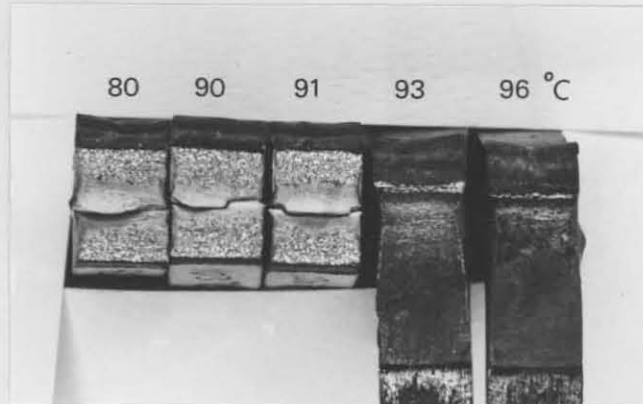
Fracture surfaces of hot rolled bead-on-plate 3CR12 bent specimens, welded with an AISI 316L filler metal. 90° bends were achieved at temperatures above the FATT while brittle cleavage fracture occurred in the HT HAZ at temperatures below 93°C. Test temperatures (°C) are also indicated.
